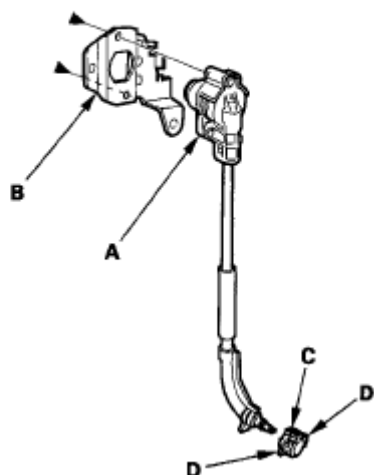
Separating Door Cylinder And Outer Handle Protector
